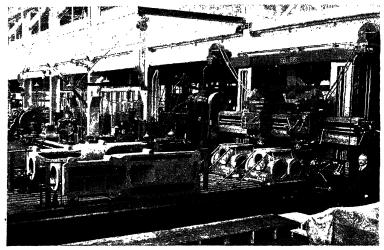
Multihead miller planer. Several pieces will be machined at one pass of the table. (Sellers.)
